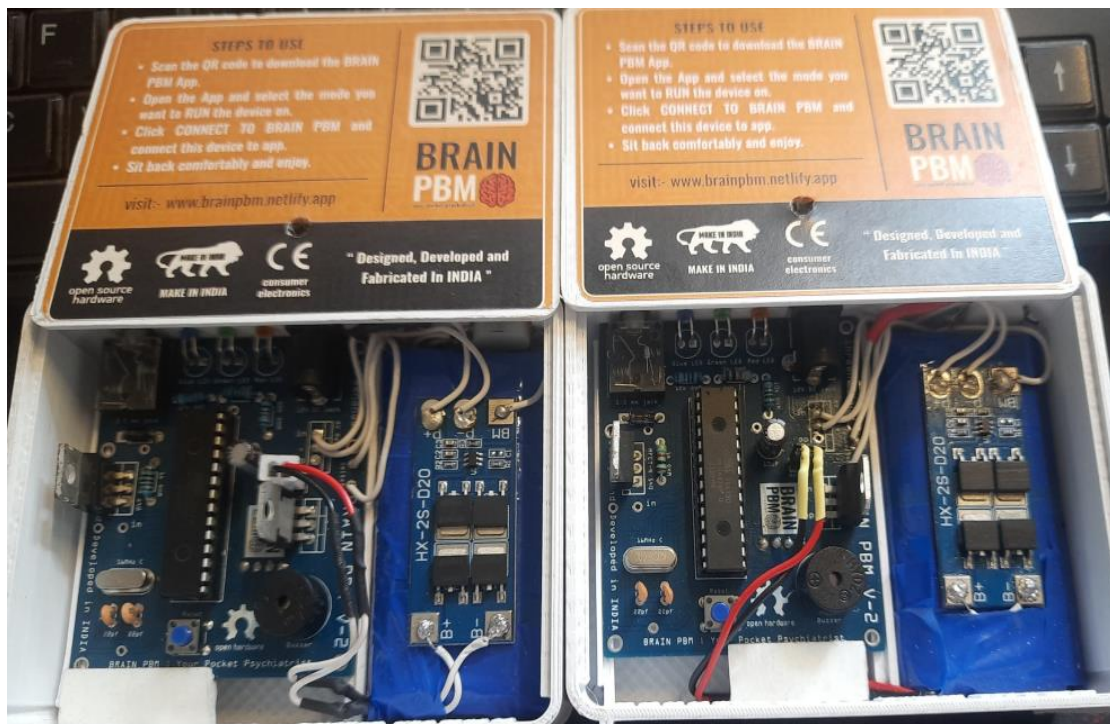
completely mounted and assembled pocket unit hosting custom PCB and the rechargeable batteries.
